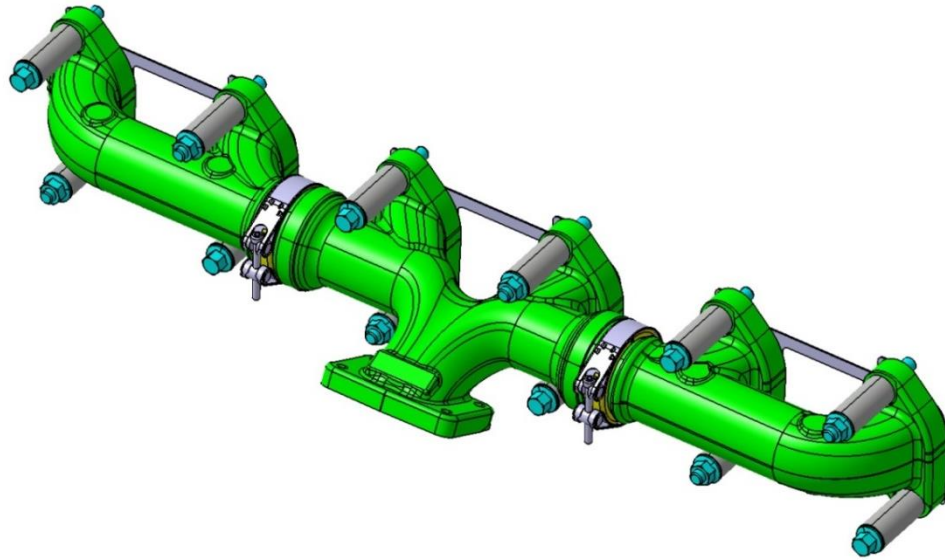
Ford Otosan heavy duty diesel engine exhaust manifold.
